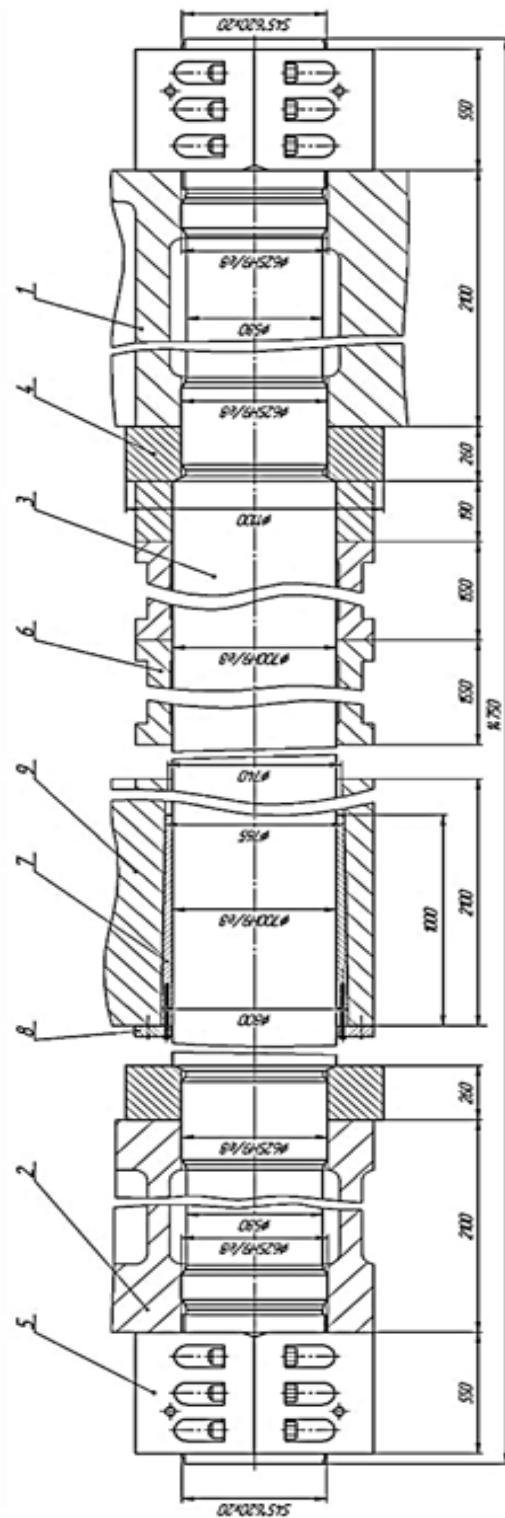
Design of assembled column with shoulders of hydraulic forging press
